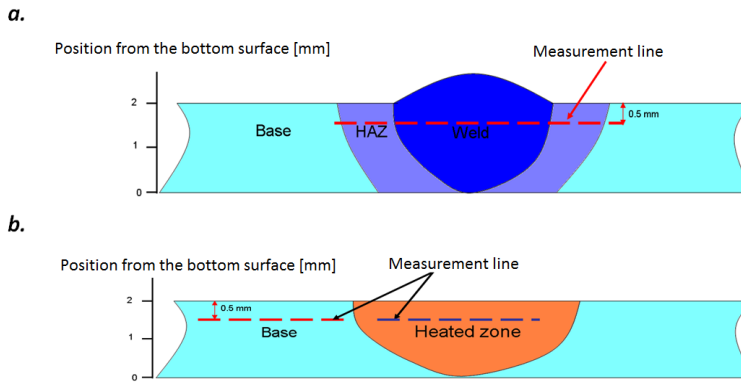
The locations of hardness measurements of conventionally welded and welded with additional heating of DP600 plates. The measurements were performed for (a) HAZ (of welding) and weld zones and (b) beneath the burners.
